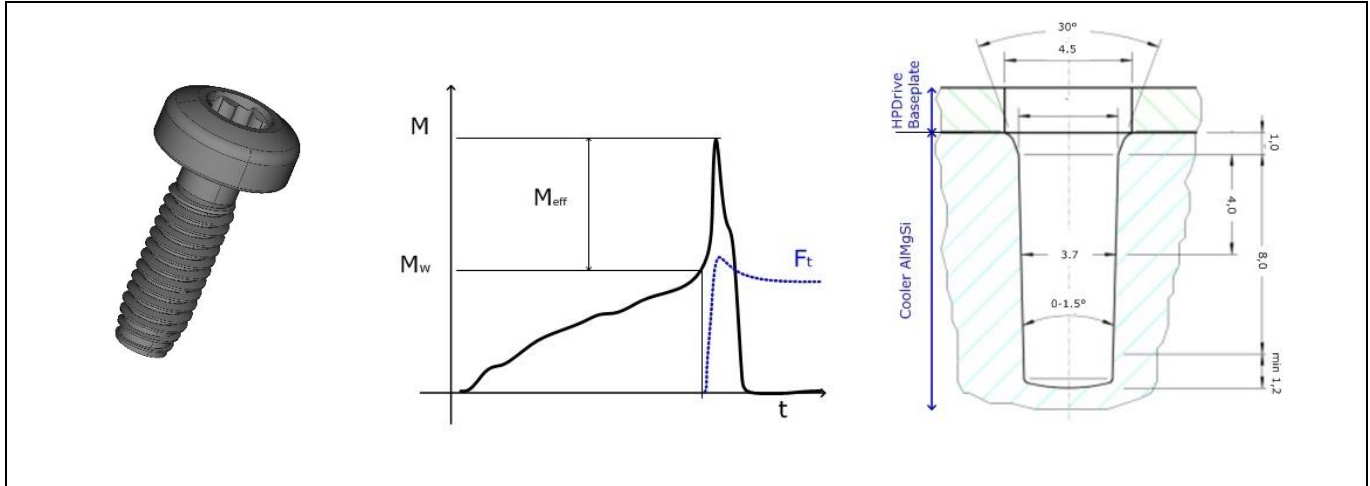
Typical appearance of the self-tapping EJOT ALtracs Plus WN5152 AP 40x12/10. A principal torque and mounting force diagram as well as drawing of the required fixing holes in the cooler. The holes can be also drilled with a standard drill tool (3.7mm 0°).
